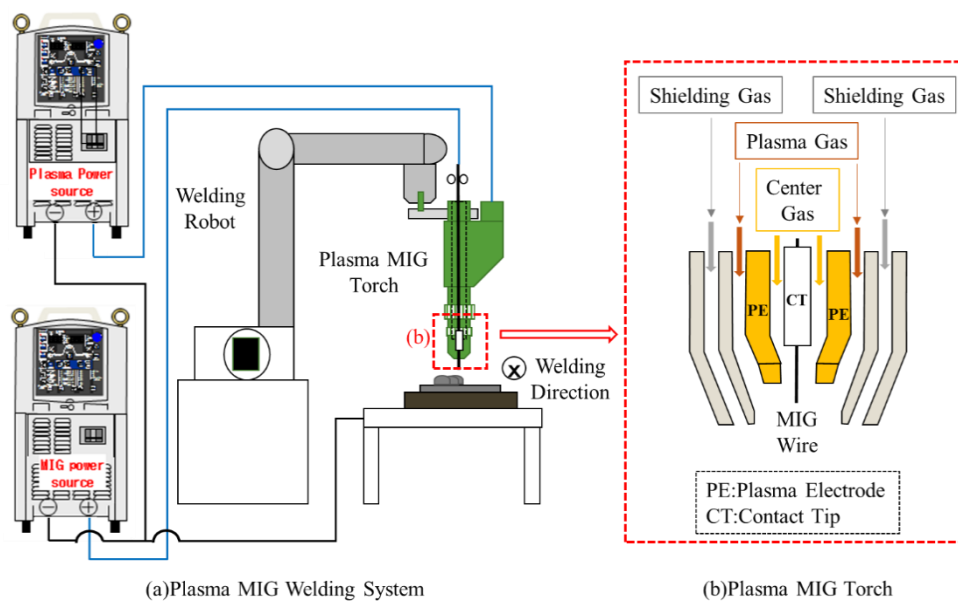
Schematic illustration of (a) plasma MIG welding system and, (b) plasma MIG torch
